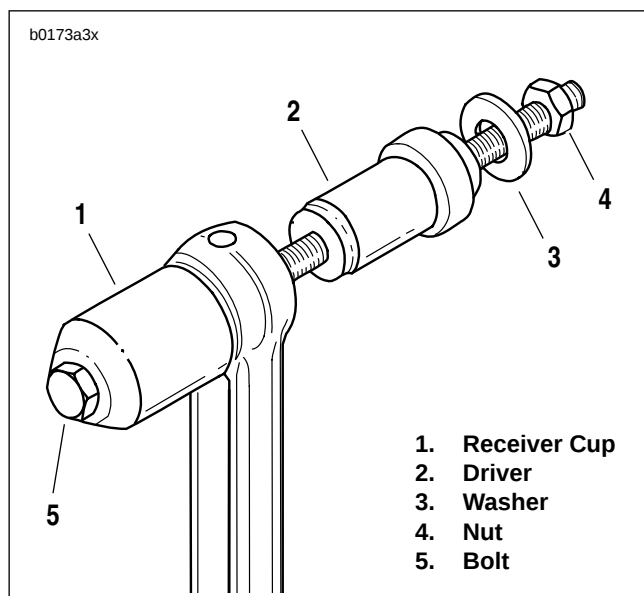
Piston Pin Bushing Tool Assembly for Bushing Removal
